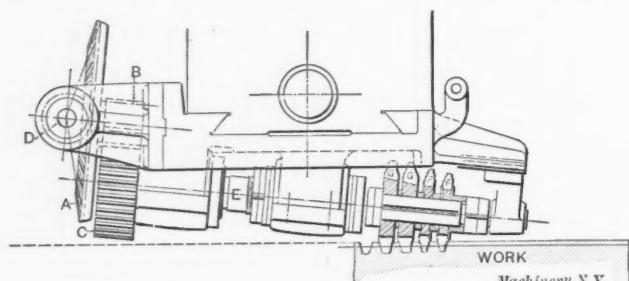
Diagram showing Angular Position given the Spindle of the Reinecker Rack-cutter to obtain Large Driving Gear at C.
